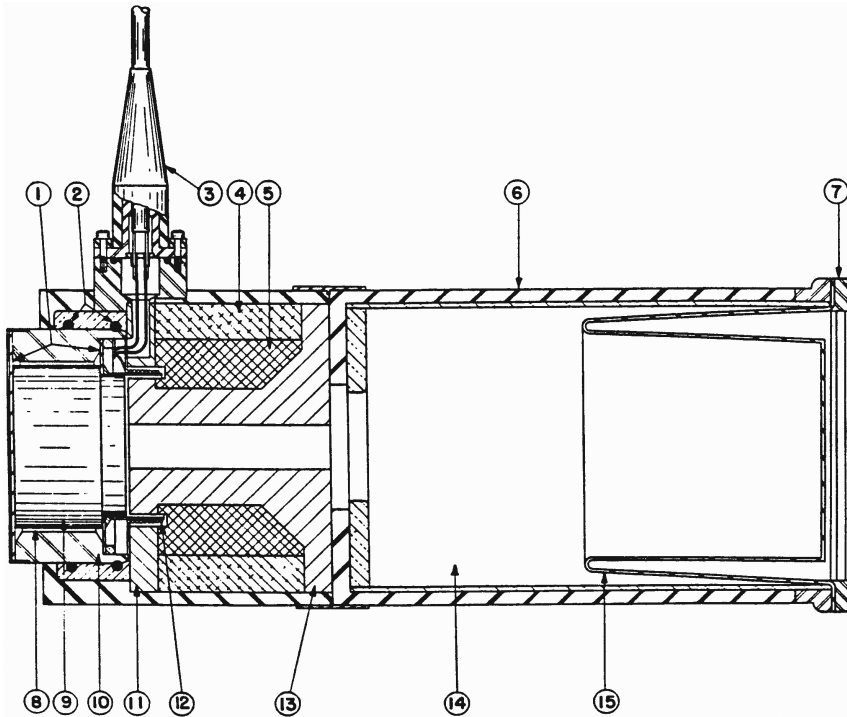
Assembly drawing of the USRD J9 transducer; 1, rubber seals; 2, rubber O-rings; 3, cable gland; 4, magnet; 5, lead; 6, rubber jacket; 7, grille; 8, slit filled with silicone oil; 9, magnesium diaphragm; 10, diaphragm housing; 11, front pole pieces; 12, coil; 13, back pole piece; 14, compensating air chamber; 15, rubber compensating bag. Overall length, 11 in.; diameter, 4-1/2 in. (adapted from Bobber, 1970).
